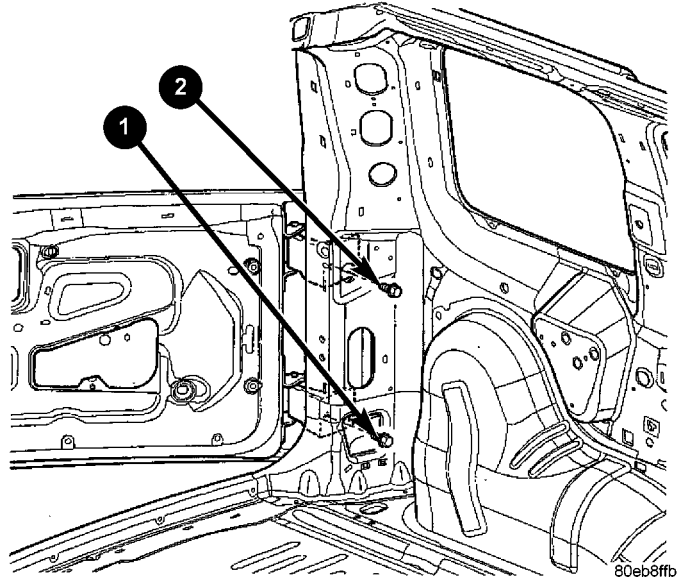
HINGE FASTENERS/INNER TORQUE SEQUENCE
